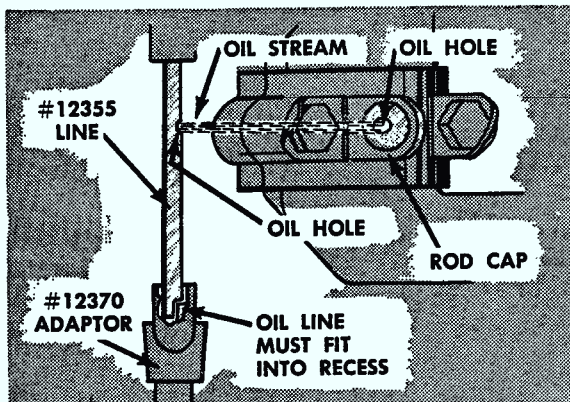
On early models, connecting rod bearing was lubricated by oil spray from hole in oil line as shown. Be sure the squared-off end of the oil line fits into the recess in oil pump adapter when reassembling engine.
